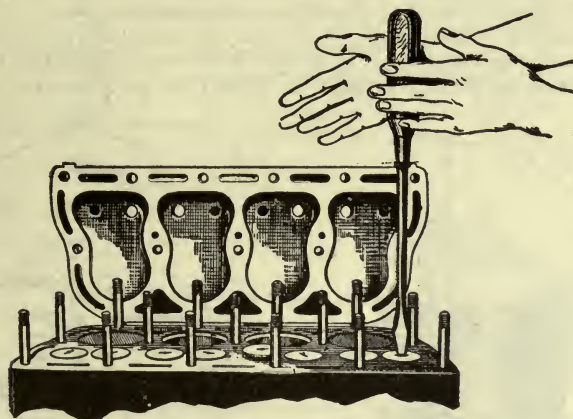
Grinding Valves Using a Screw Driver as a valve grinding tool (Overland).
